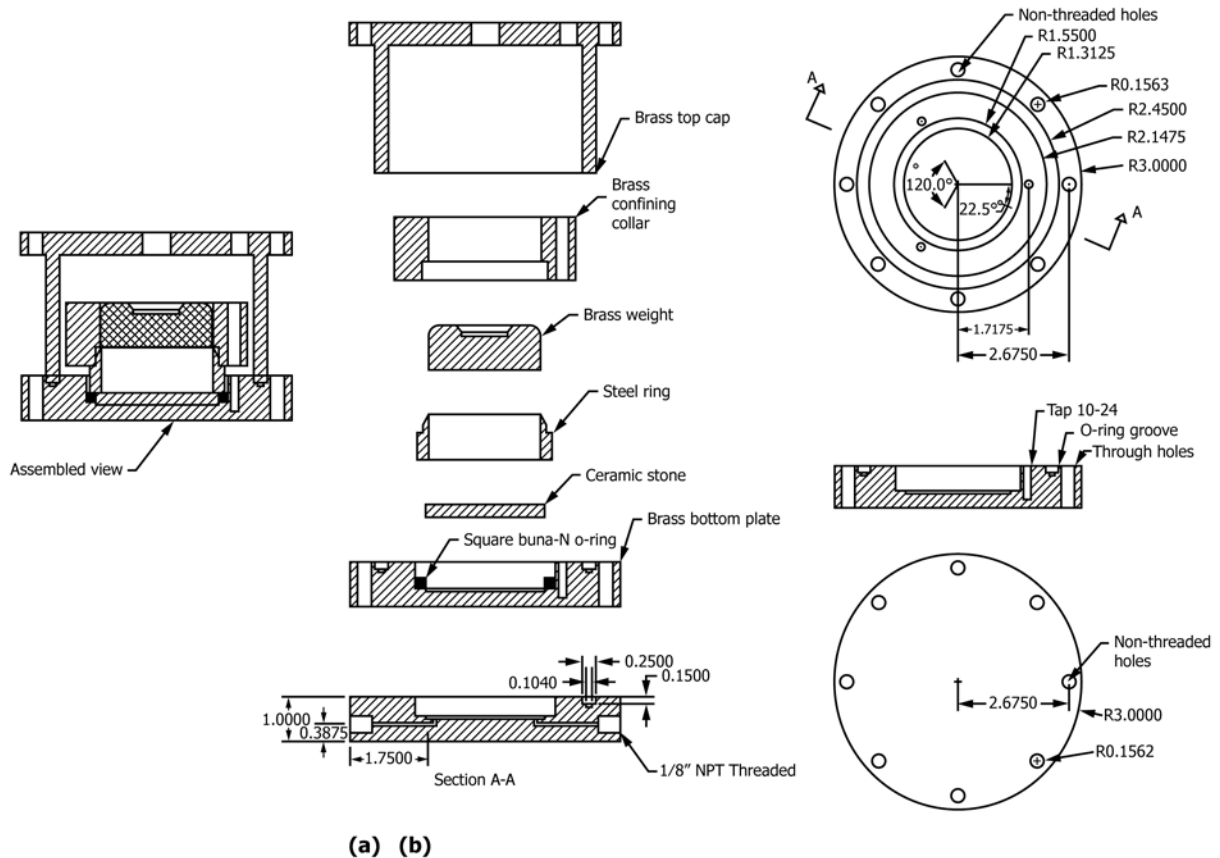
Pressure Chamber Setup: (a) Expanded Cross-Section; (b) Base Detail
